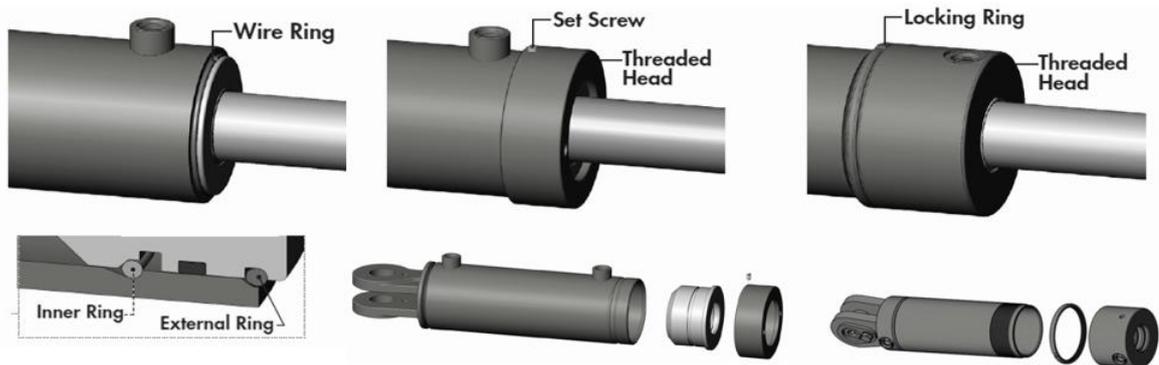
Comparison of wire ring-, set screw- and locking ring style hydraulic cylinders (modified) (Degelman 2016).
